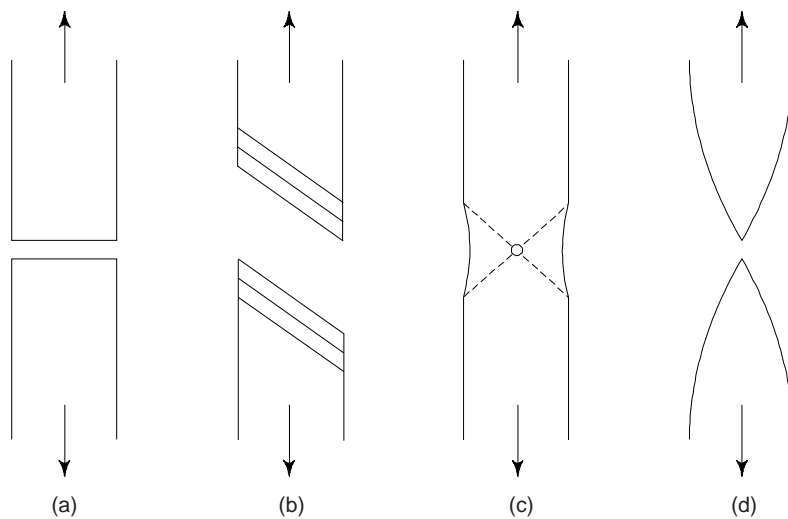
Types of fractures observed in metals subjected to uniaxial tension (a) brittle fracture (b) shear fracture (c) ductile fracture (d) completely ductile fracture
